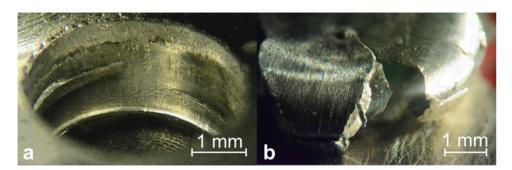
(a) Fracture at the punch-sided sheet and (b) Fracture at the die sided sheet (radial crack).
